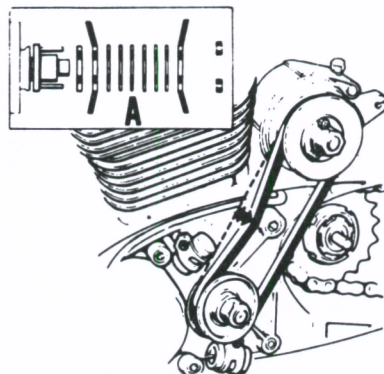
View of generator drive used. Inset (A) shows stacking order of pulley wheel and spacers.
